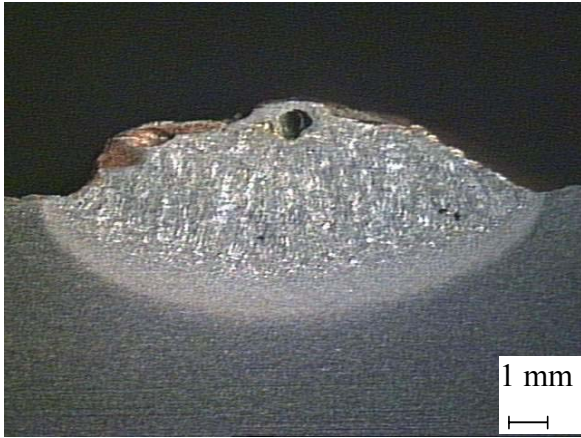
Cross-section macrographs of the initial bead-on-plate wet welds deposited with three electrodes types at 50 m using electrode positive.
